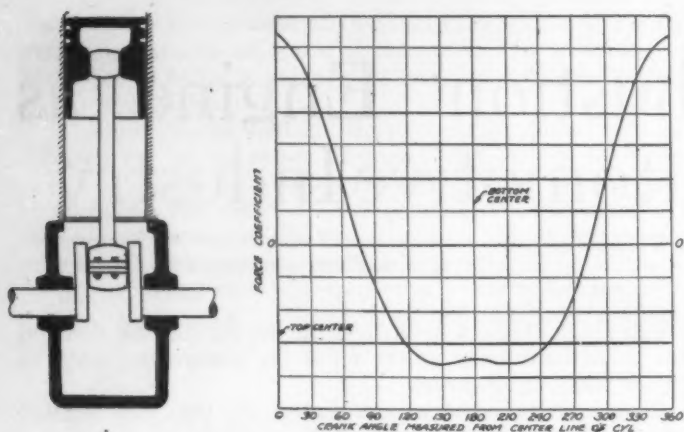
UNBALANCED CONDITION PRESENT IN A SINGLE-CYLINDER ENGINE
